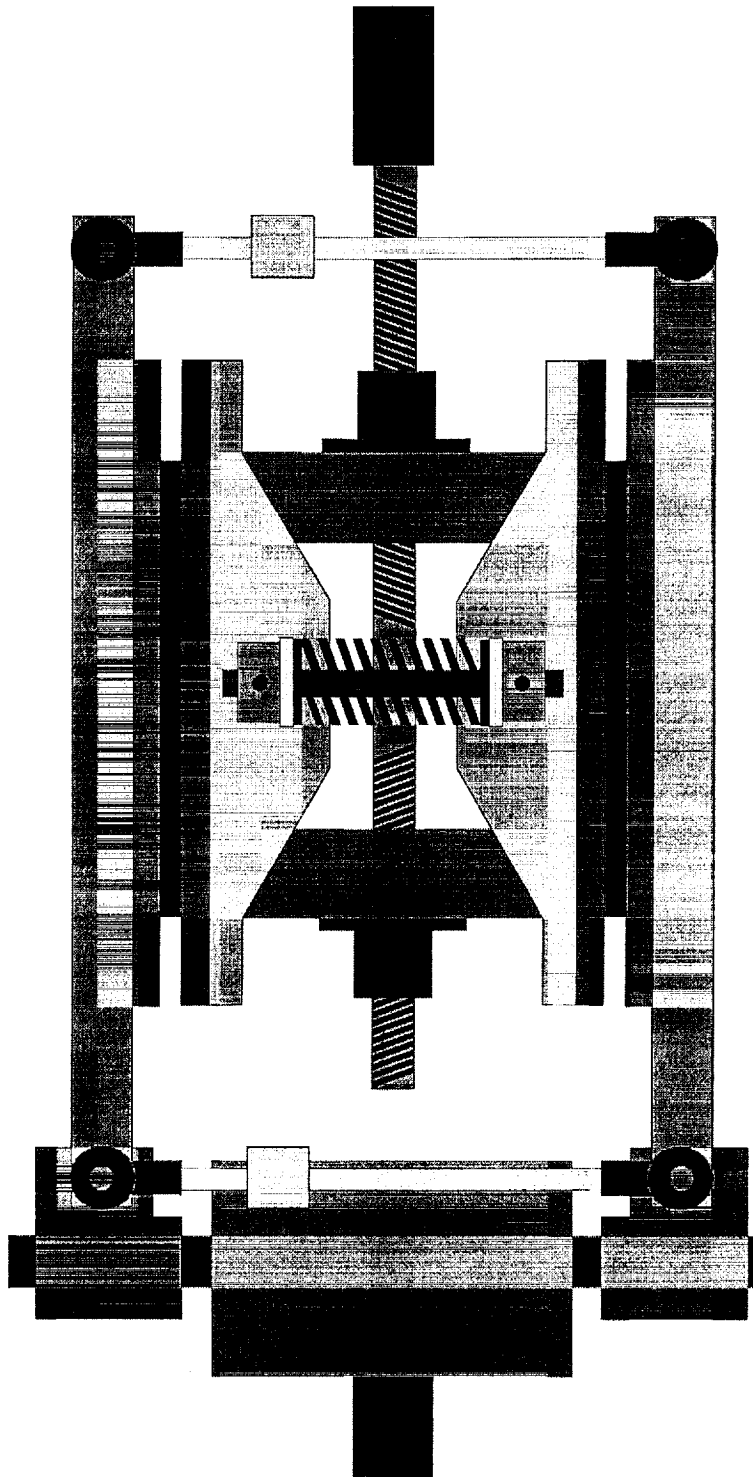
Advanced dual lap shear test fixture for testing simple shear of a flat sheet and simple shear with static compression/dilation of a flat sheet.
